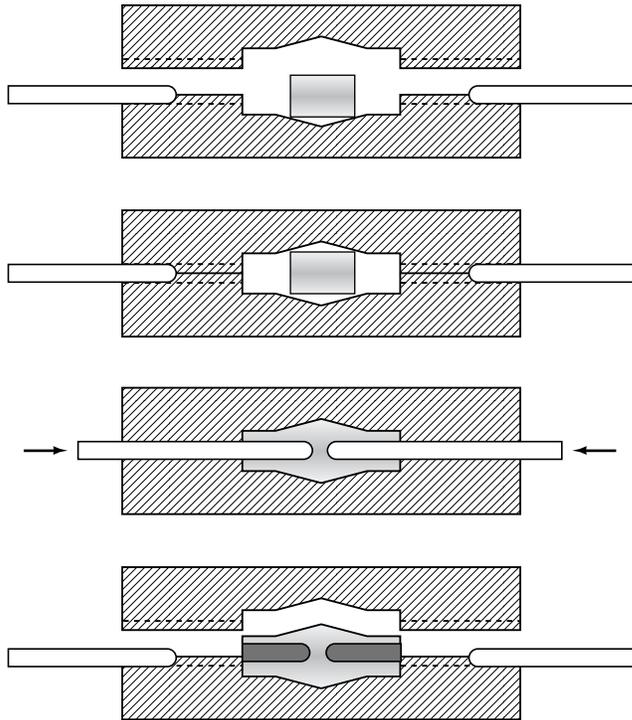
Schematic of multistroke forging, which is a closed-die forging process in which horizontal punch action is introduced in combination with vertical action of the forging press. This makes possible the forming of cavities not possible with simple forging procedures. Multistroke forging is used in the manufacture of such items as complex valve bodies.
